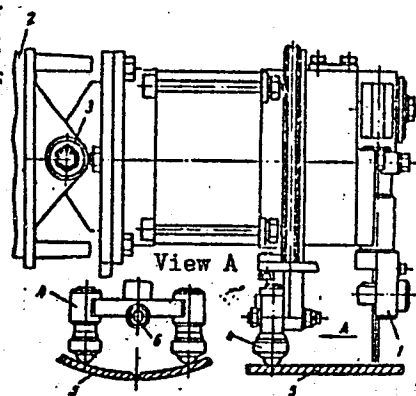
1 - welding head; 2 - arm; 3 - arm hinge; 4 - bearing rollers; 5 - boiler shell; 6 - hinge
